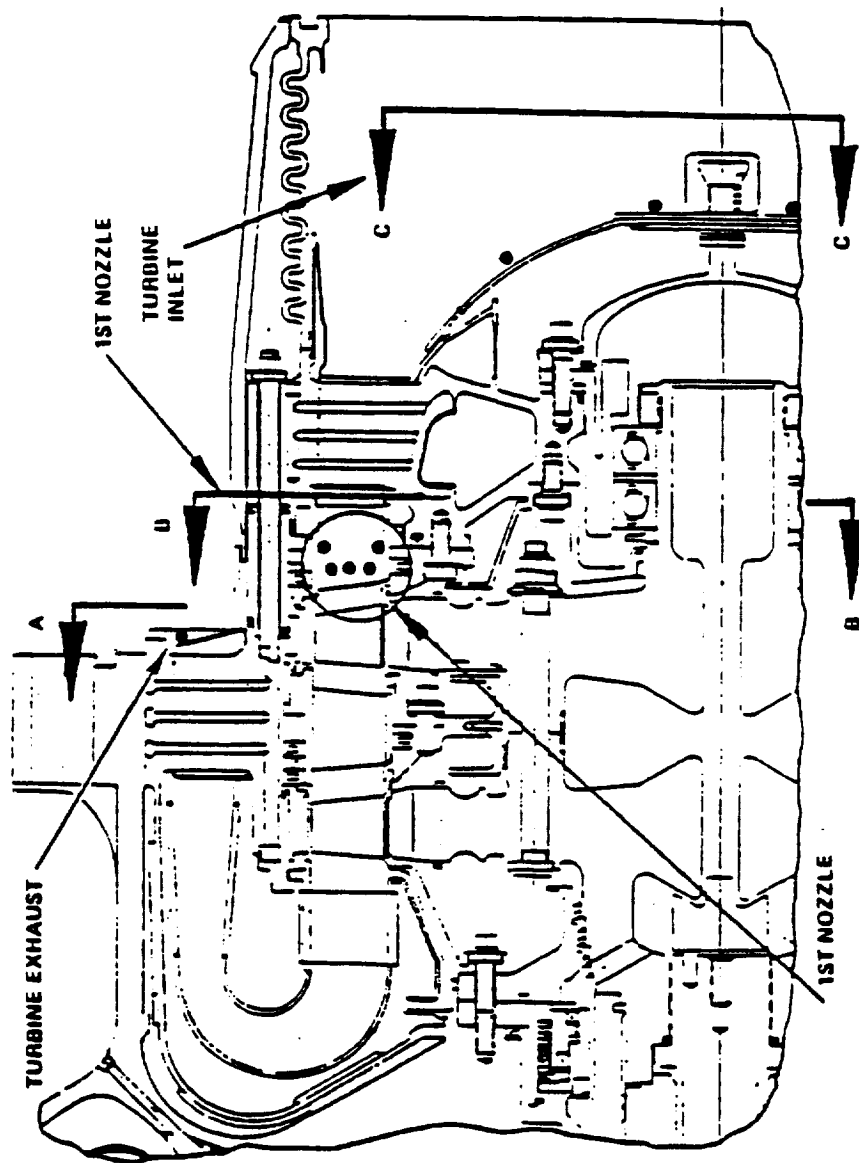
Cross-Sectional View of the Instrumented HPFTP Turbopump
